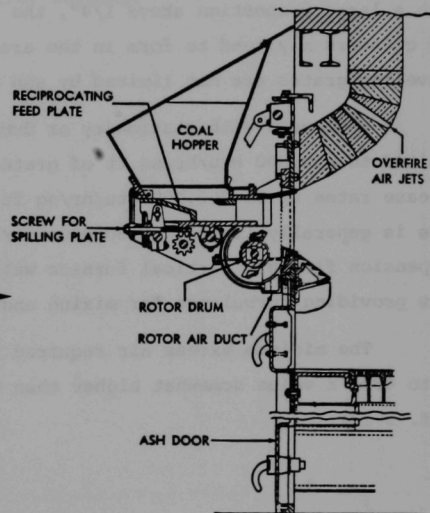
Spreader stoker, feeder details (Ref. 3-12).
